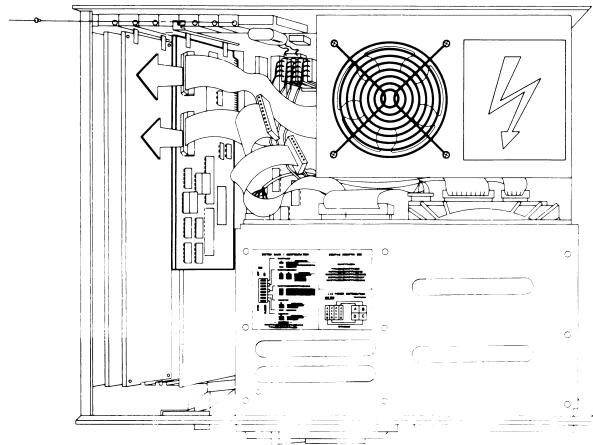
Removing the Multipurpose Fixed Disk Drive Controller Board Signal Cables.
